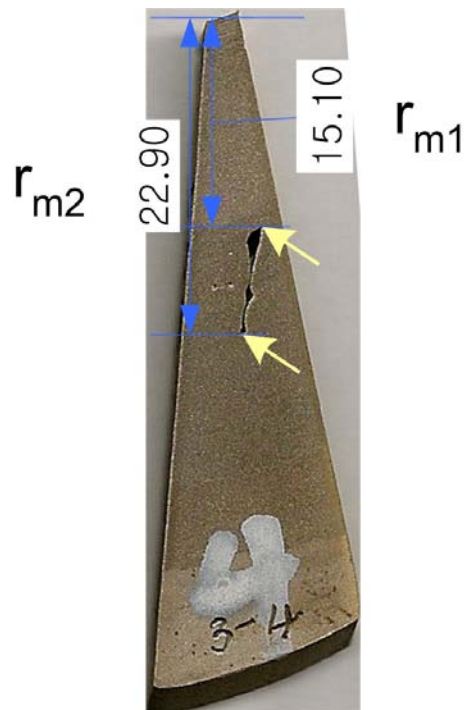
Flaw #3 Interface J-weld and Nozzle O.D.
